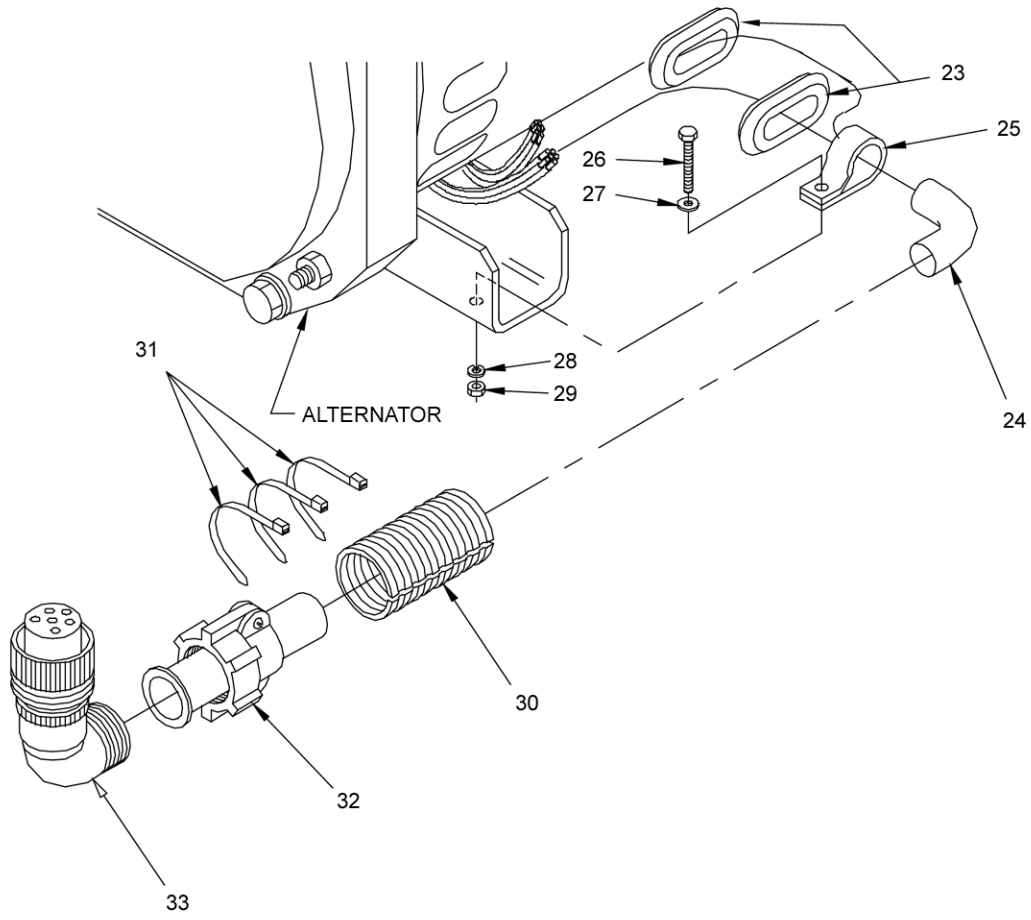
Engine Alternator Assembly (MEP-531A) (Sheet 2 of 2).
